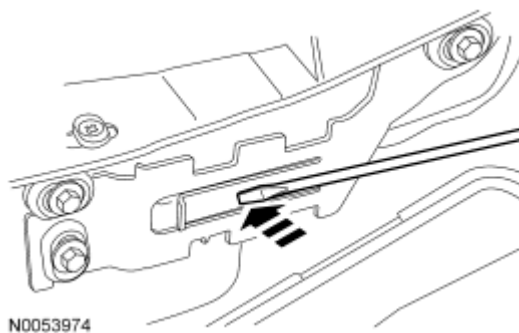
Pushing Retainer Rearward To Remove Power Steering Reservoir
